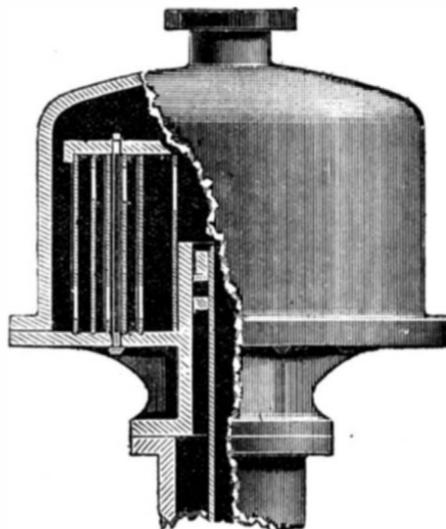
HALF ELEVATION AND SECTION OF THE SEPARATOR.
